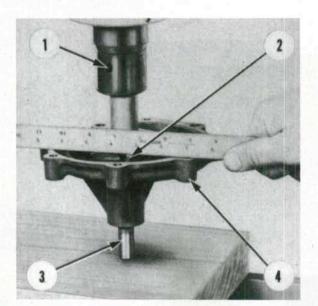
Support impeller shaft (3) and press impeller onto shaft so impeller vanes (2) are flush with rear face of housing (4).
